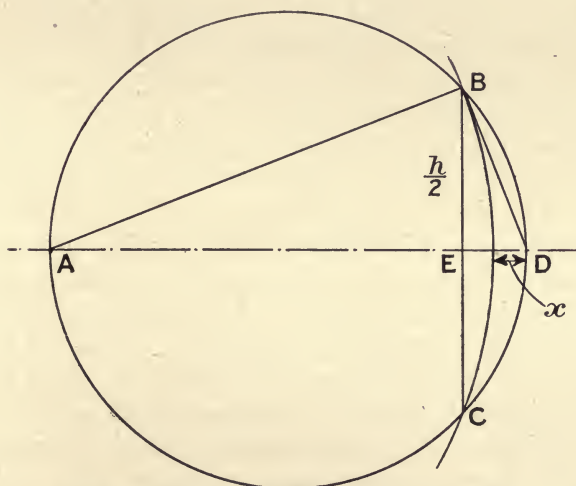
GAUGING HOLE WITH POINTED ROD
